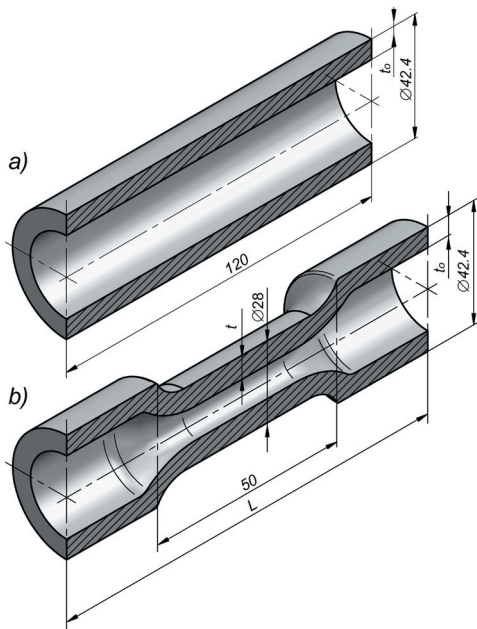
Shape and dimensions of a) tubular specimen, b) hollow shaft
